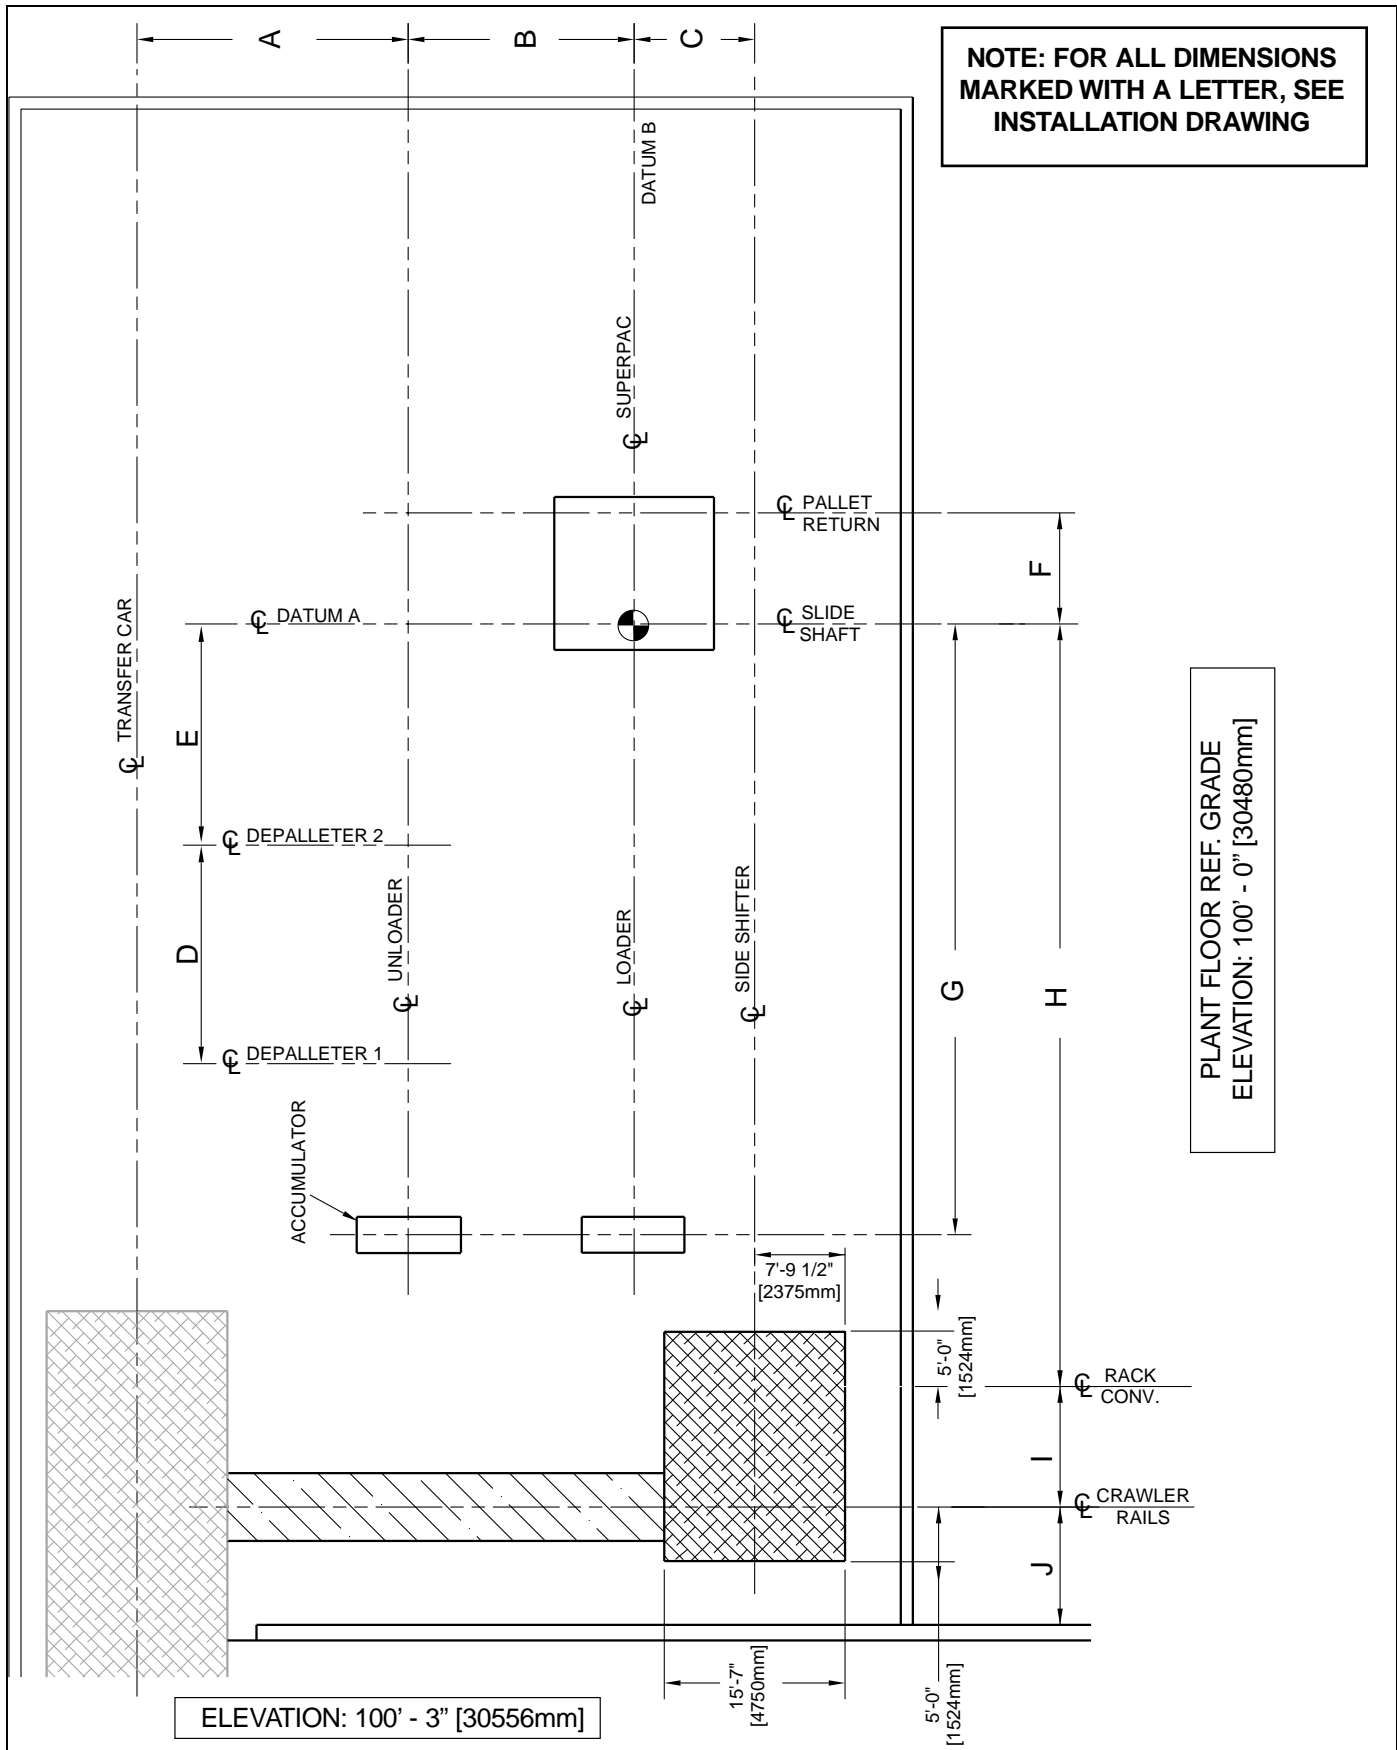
MS-12 BESSER-MATIC INSTALLATION (ref. installation print - sheet 1).
